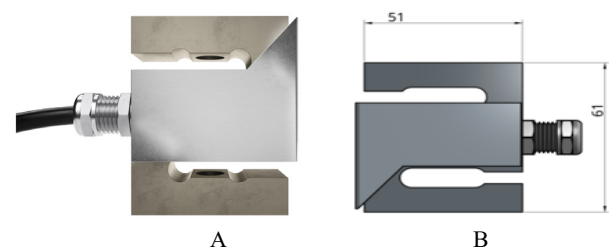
Details of the used dynamometer in A. Dimensions of the system in B in millimeter.
